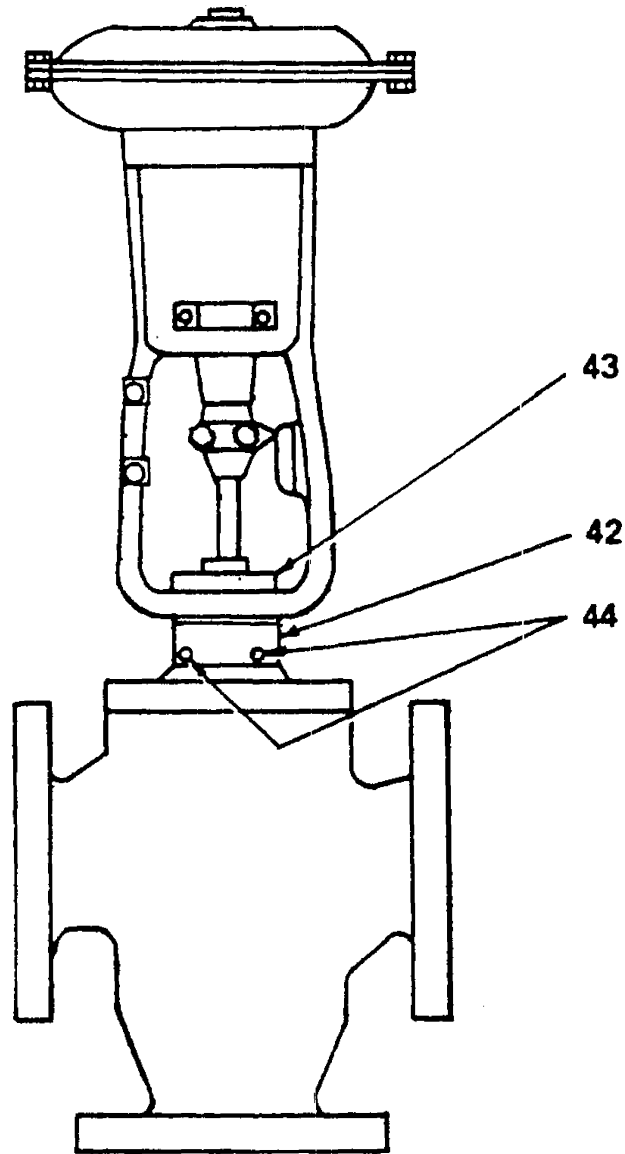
Teflon Asbestos Packing Assembly for 8-Inch Valves
